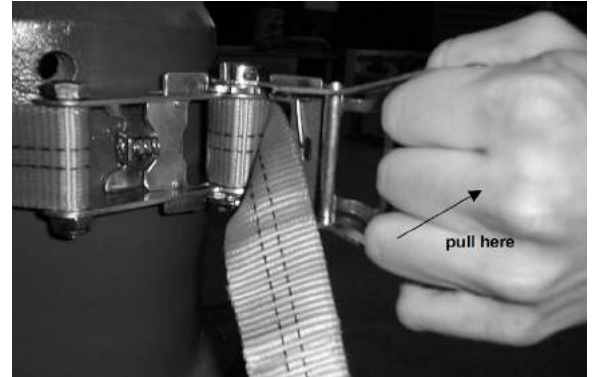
FASTENING OF THE COLLAR BAND
